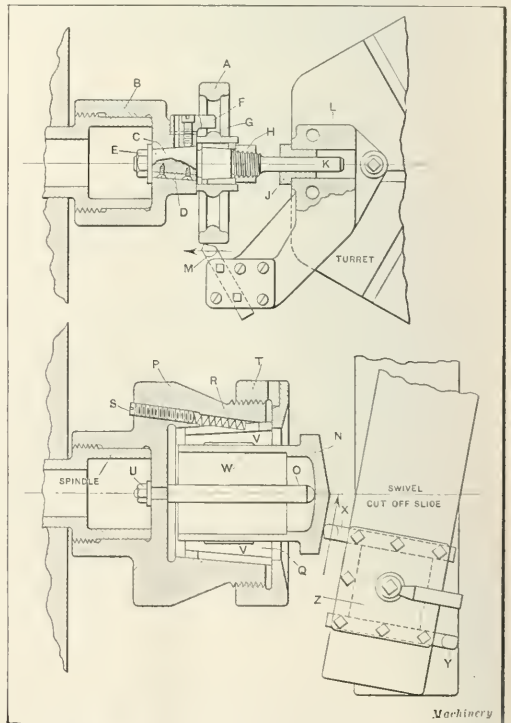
Spoke Gear Blank held on an Expanding Bushing, and Pot Casting held in a Collet Chuck
